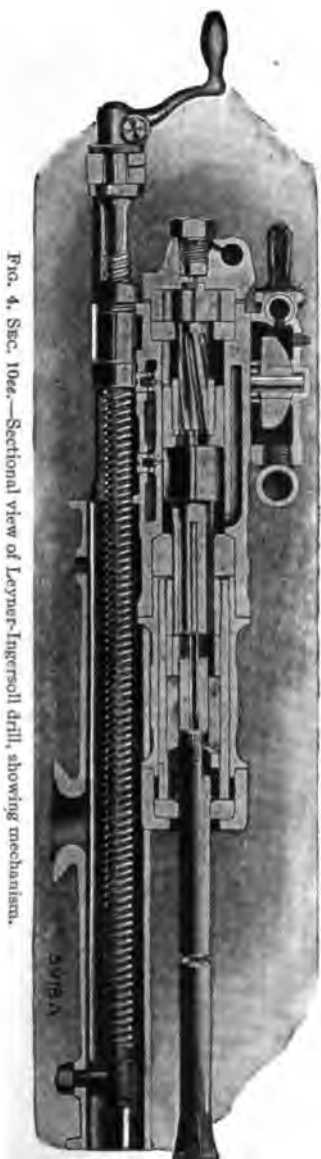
SEC. 102.—Sectional view of Leyner-Ingersoll drill, showing mechanism.
